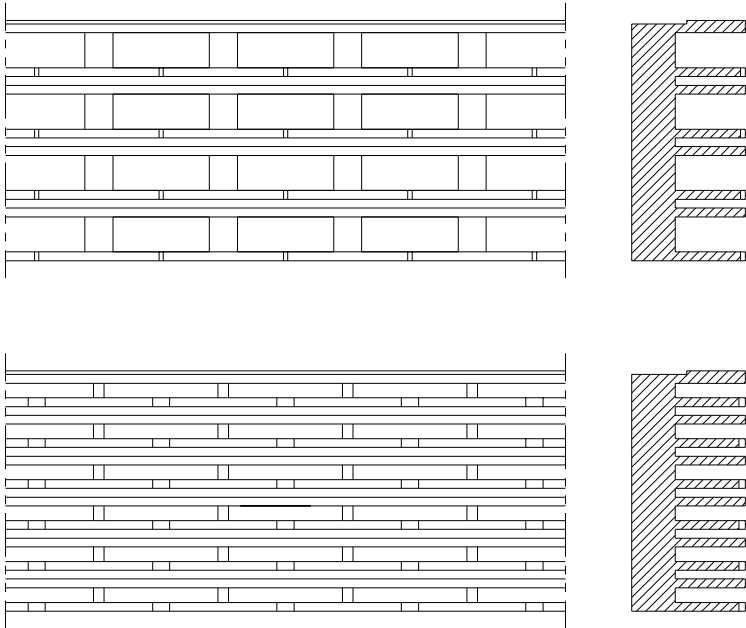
Unwrapped Views of Diverging 8-Bladed (upper) and 12-Bladed (lower) Seals
